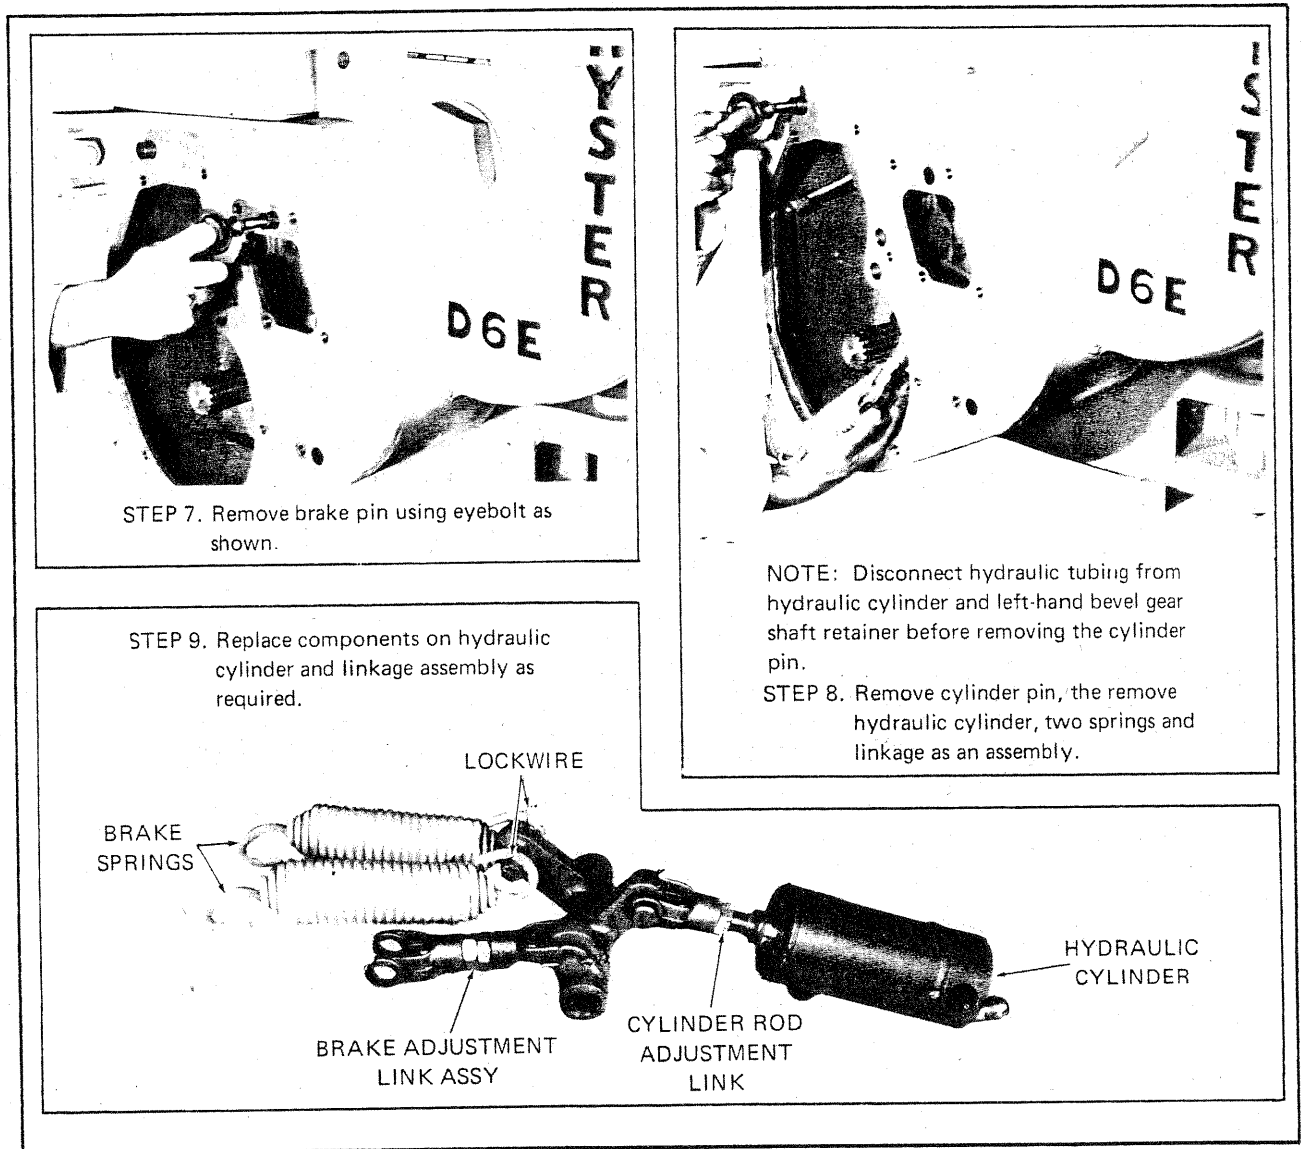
REMOVAL OF HYDRAULIC BRAKE ASSEMBLY, POWER CONTROLLED WINCH (Sheet 2 of 2)
